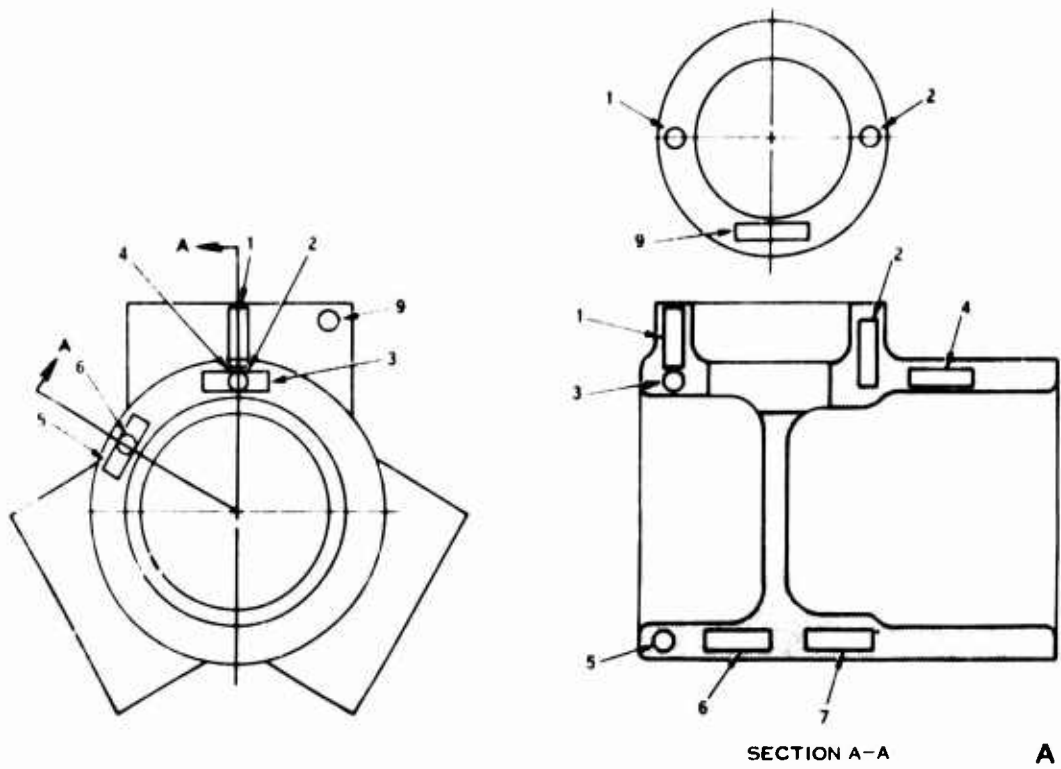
BARREL FORGING FATIGUE TEST SPECIMEN LOCATIONS
